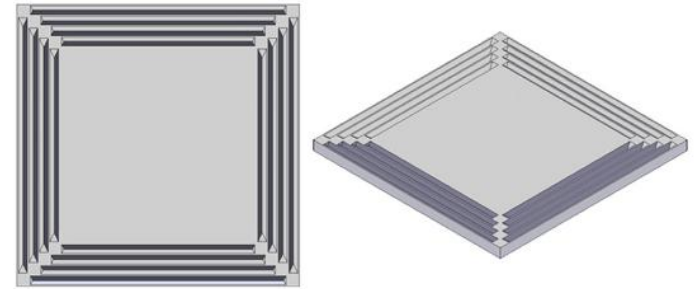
Faceted surface viewed from top and isometric viewpoints.
